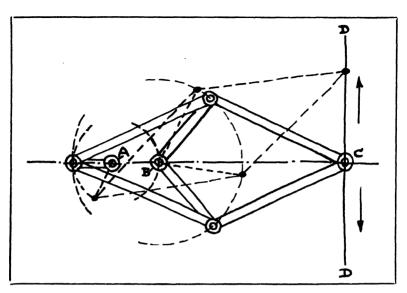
Ink Sketch of a Link Mechanism Designed to Move End C
